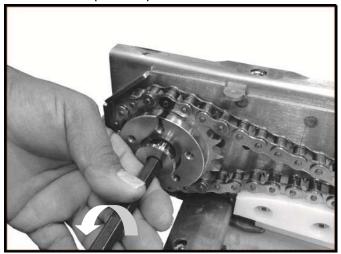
PLATFORM PIVOT SCREW (LH SIDE SHOWN)
